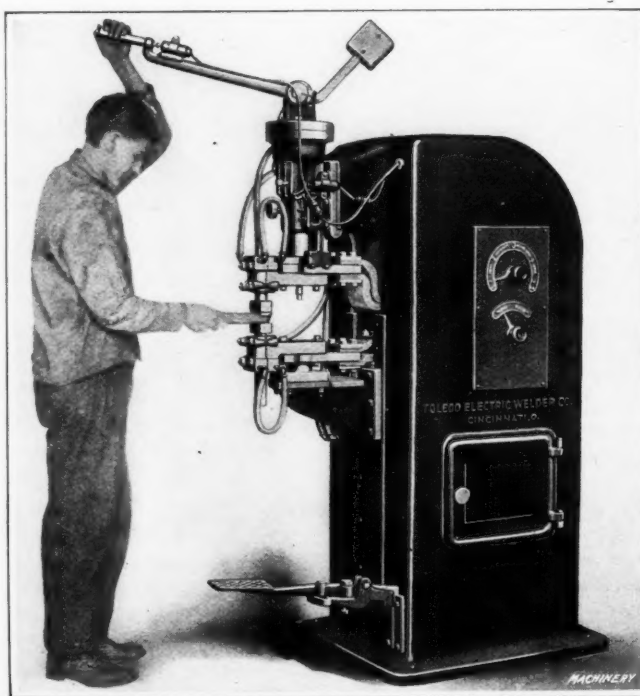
Toledo Spot-welding Machine welding High-speed Steel Insert to a Lathe Tool. At a Current Cost of Three Cents per Kilowatt-hour, the Cost should not exceed \$3 for welding 800 Pieces of 1/2 by 1/2 by 2 Inch High-speed Steel—a Day's Work
